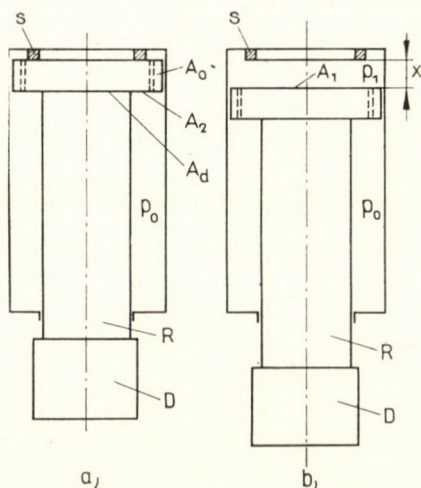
Schematic diagram of the single-chamber high-speed impact machine
